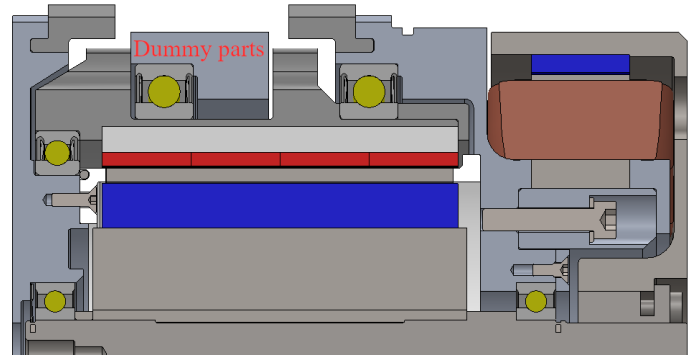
Cross sectional view of upper half of the drive unit showing the additional bearing and aluminium section on the sprocket.
